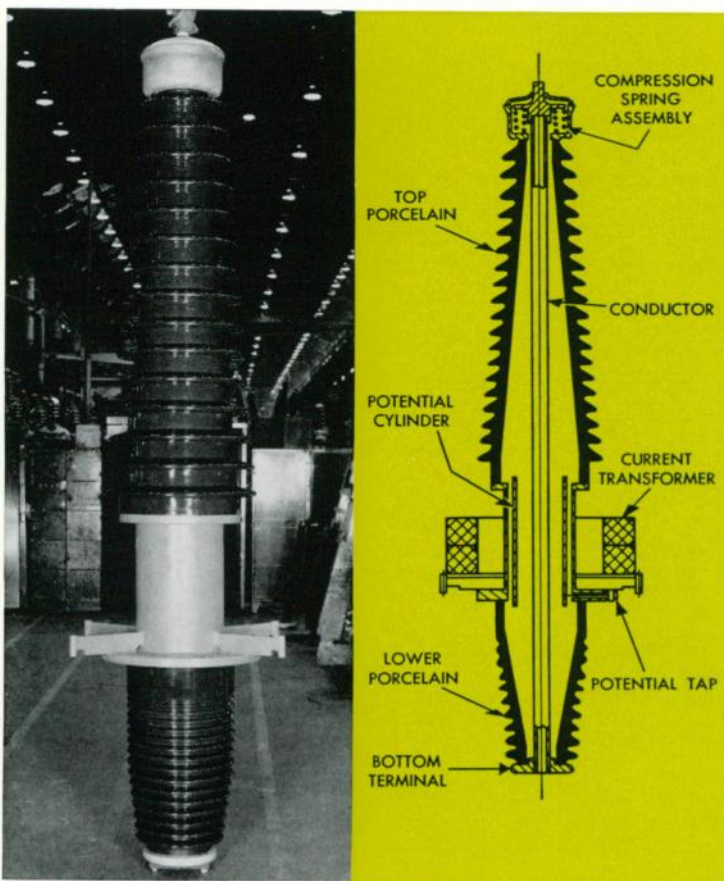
Cross section of 230-kv gas-filled bushing, and a completely assembled bushing.
